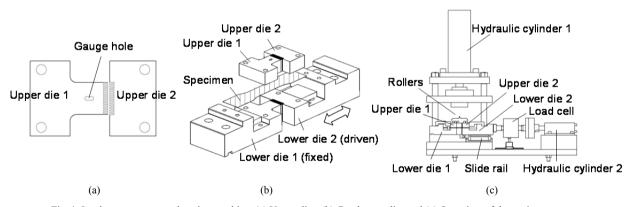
In-plane stress reversal testing machine. (a) Upper dies, (b) Comb-type dies and (c) Overview of the testing apparatus.
